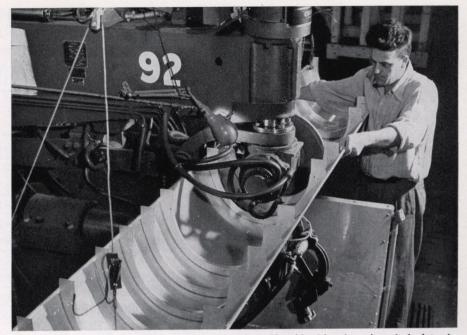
Seam welding baffles and stiffeners to the side skin of an aircraft fuel tank. Each tank has 1500 inches of seams, resistance welded at speeds up to 45 inches per minute by rotating the tank in the fixture.
